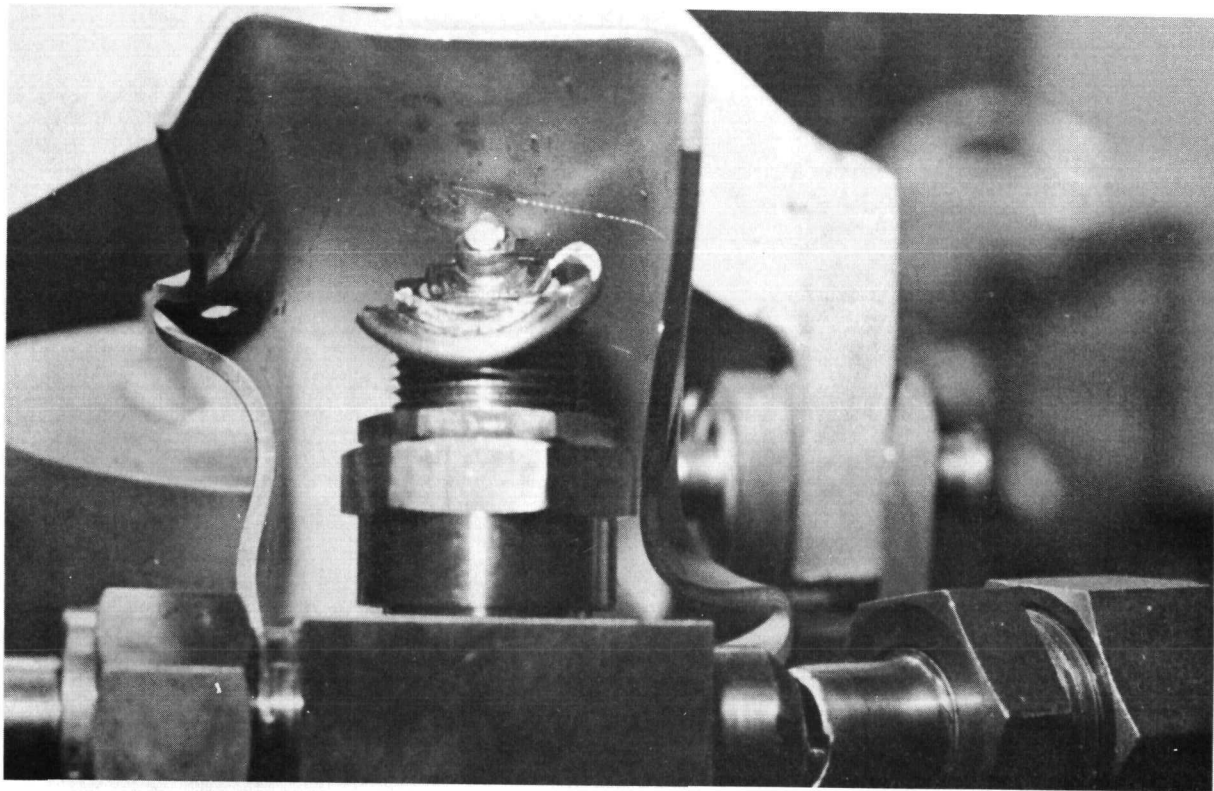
Closeup of broken valve stem and buckled valve guard.
